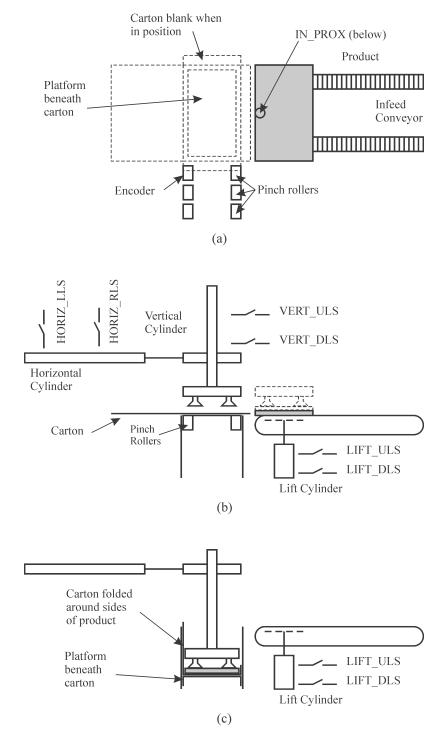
Product transfer machine: (a) top view with product in station; (b) side view, right position shown as dashed lines; (c) product
